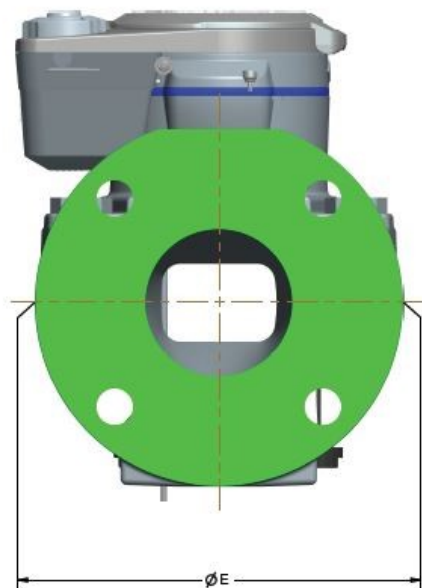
Commercial and Industrial Meter Dimensions – End View
